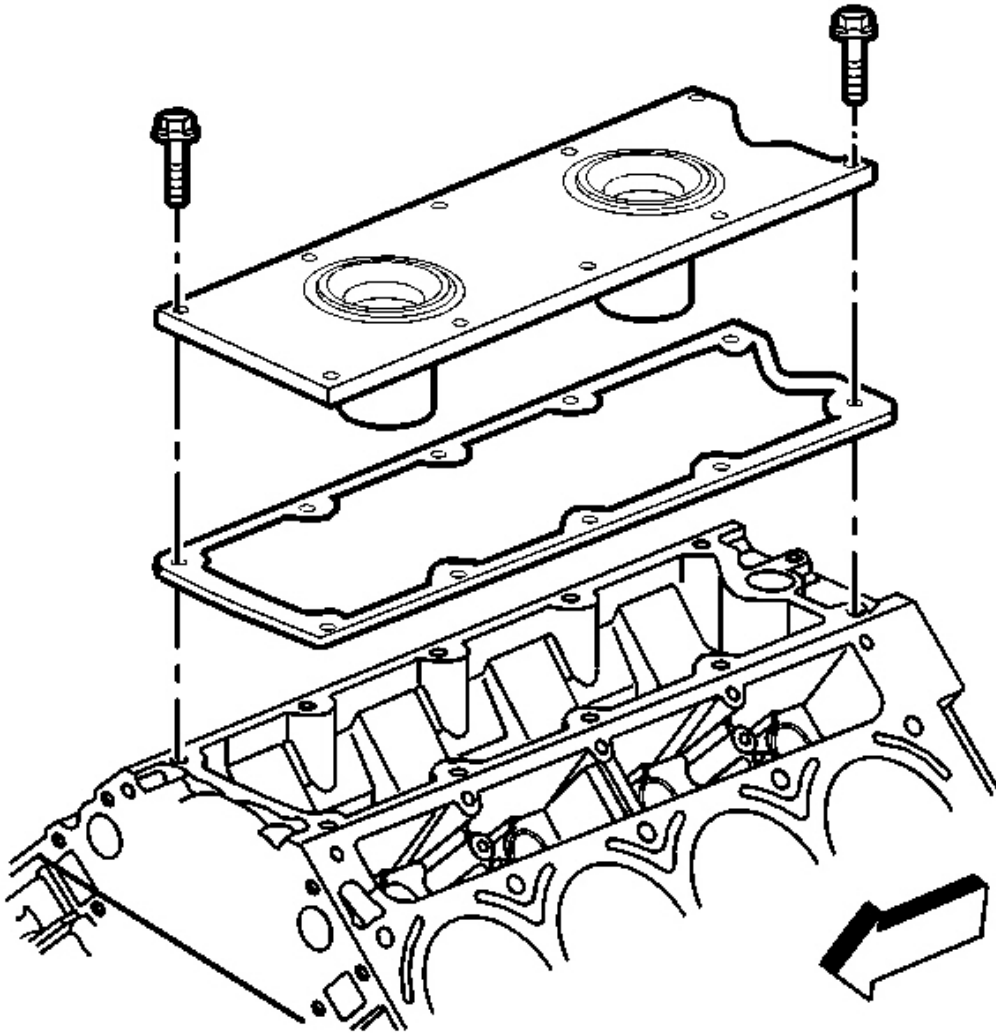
View Of Engine Valley Cover, Gasket & LS1 Engine
